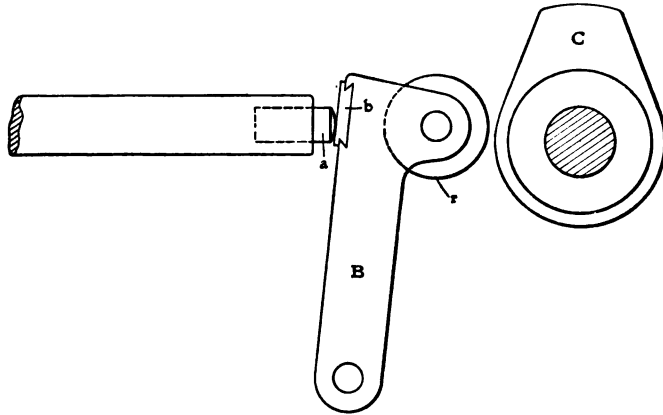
CAM, ROCKER, AND PUSH ROD.
